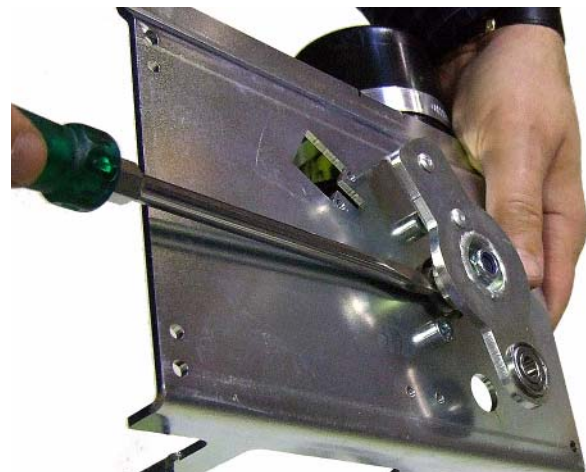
Put a screwdriver between the actuator and the motor bedstead.
